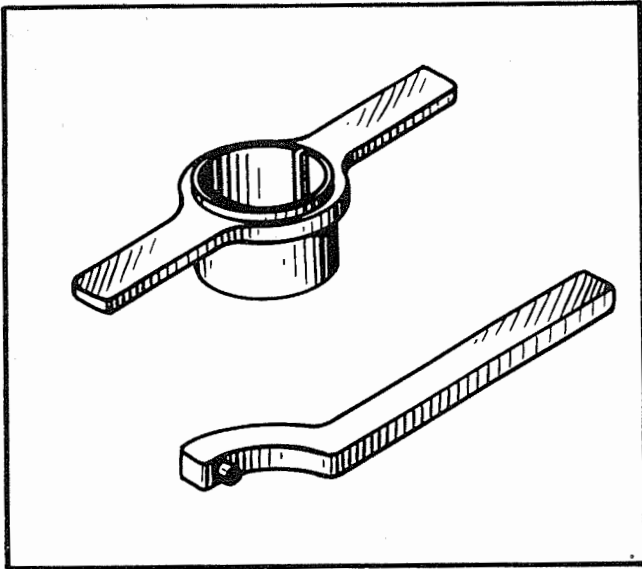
Ignition Cable Main Primary Lead Nut and Holder
